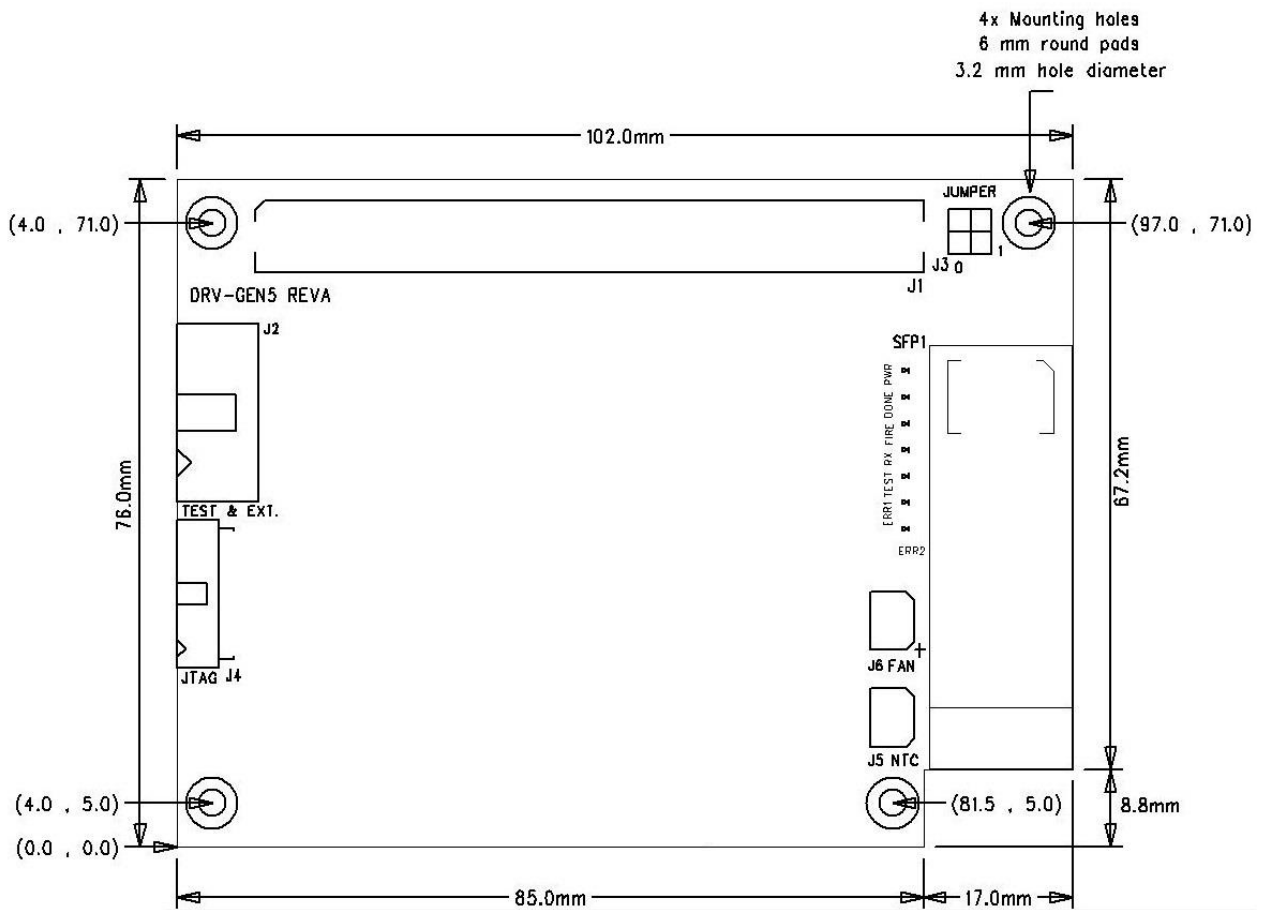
MECHANICAL DIMENSIONS, DRV-GEN5 LOWER BOARD
